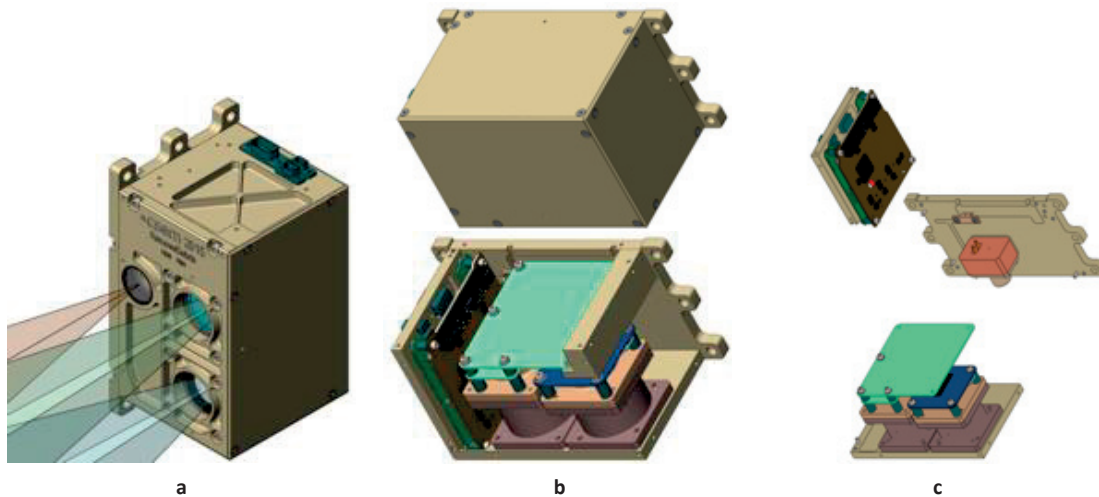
a) The LIDAR module, b) The LIDAR module back view with the plates and with the plates removed exposing the modules. c) The disassembled modules.
